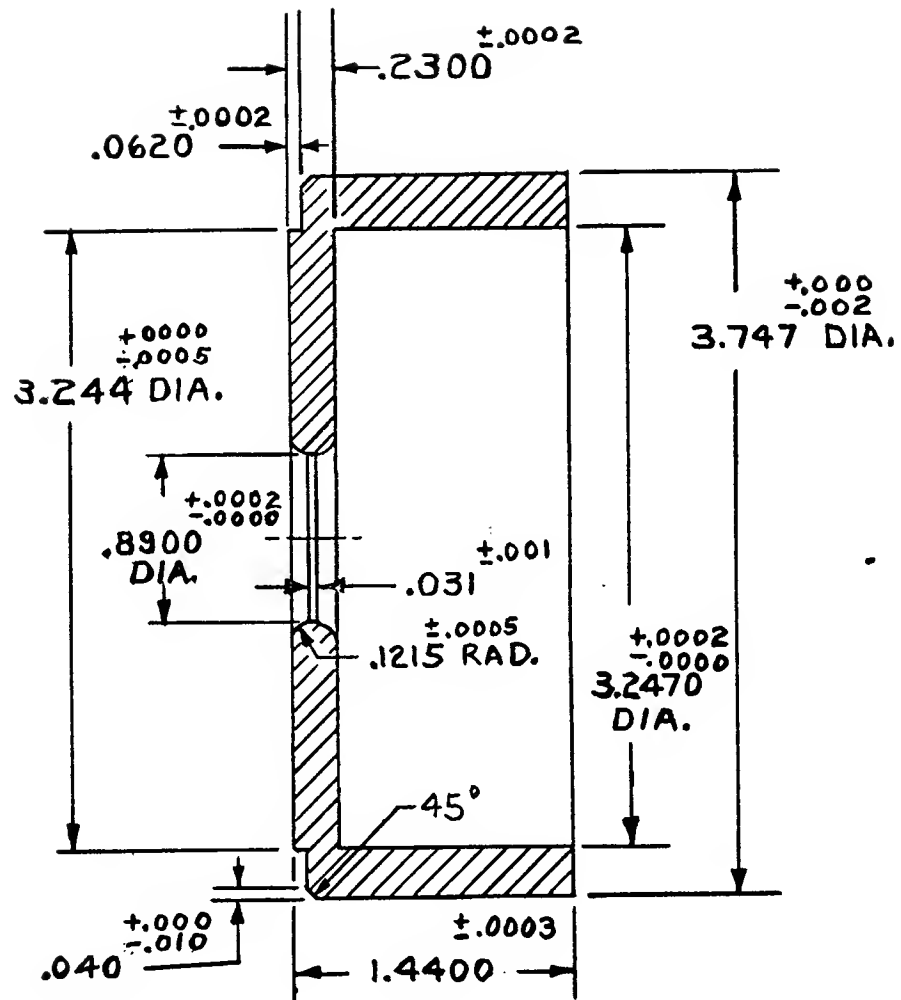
Cup machined to finished dimensions (2 π /3 mode).
